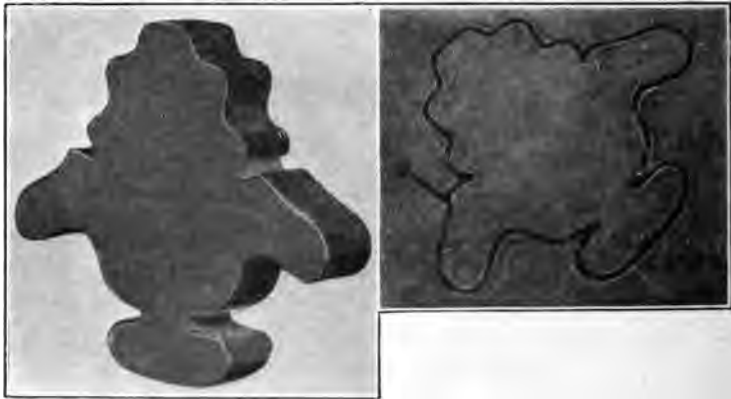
LEATHER-CUTTING PUNCH FOR SHOE MANUFACTURE AND TOOL STEEL PIECE FROM WHICH IT WAS CUT.
